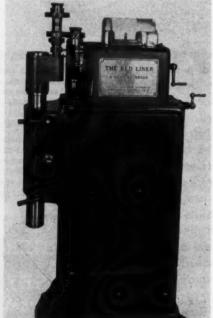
Red Liner Recording Gear Innet tion Machine.
